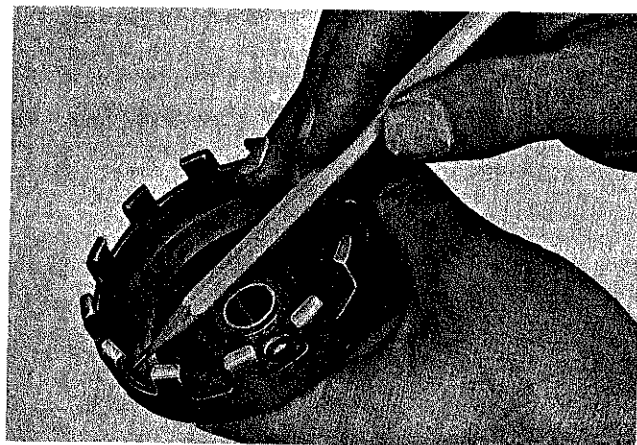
Wearing areas on the clutch drum include the sloping friction surface, and the inside of the retaining ring prongs.
